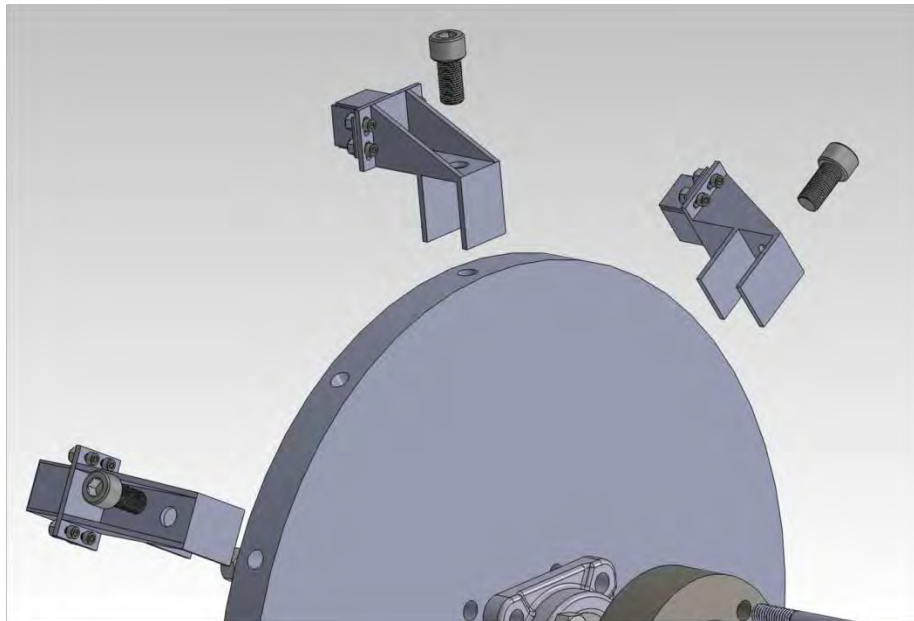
Exploded view of magnets in magnet mounts about the rotor.
